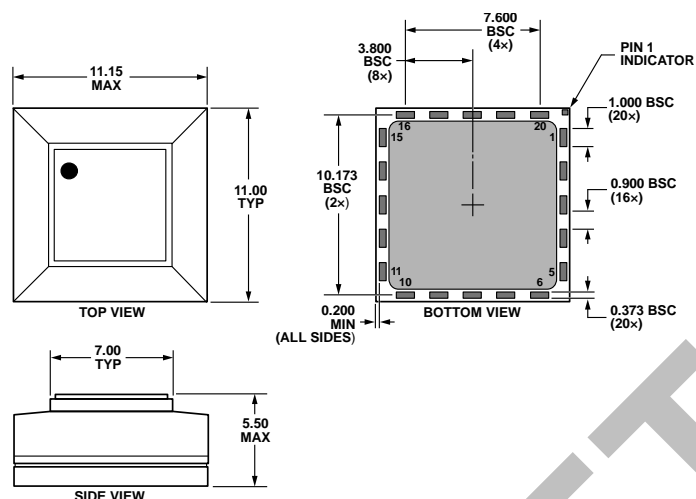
20-Terminal Stacked Land Grid Array [LGA]
